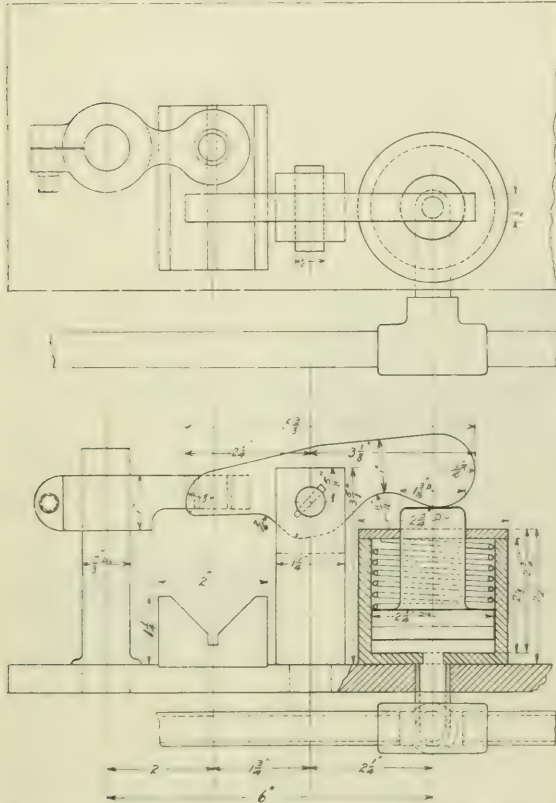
A—Pneumatic Clamp and Jig for Drilling Pins, Etc.
